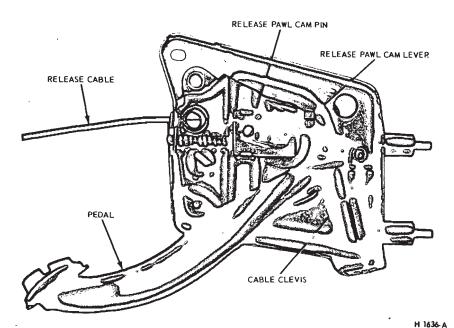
Parking Brake Control Assembly with Manual Release—Typical
